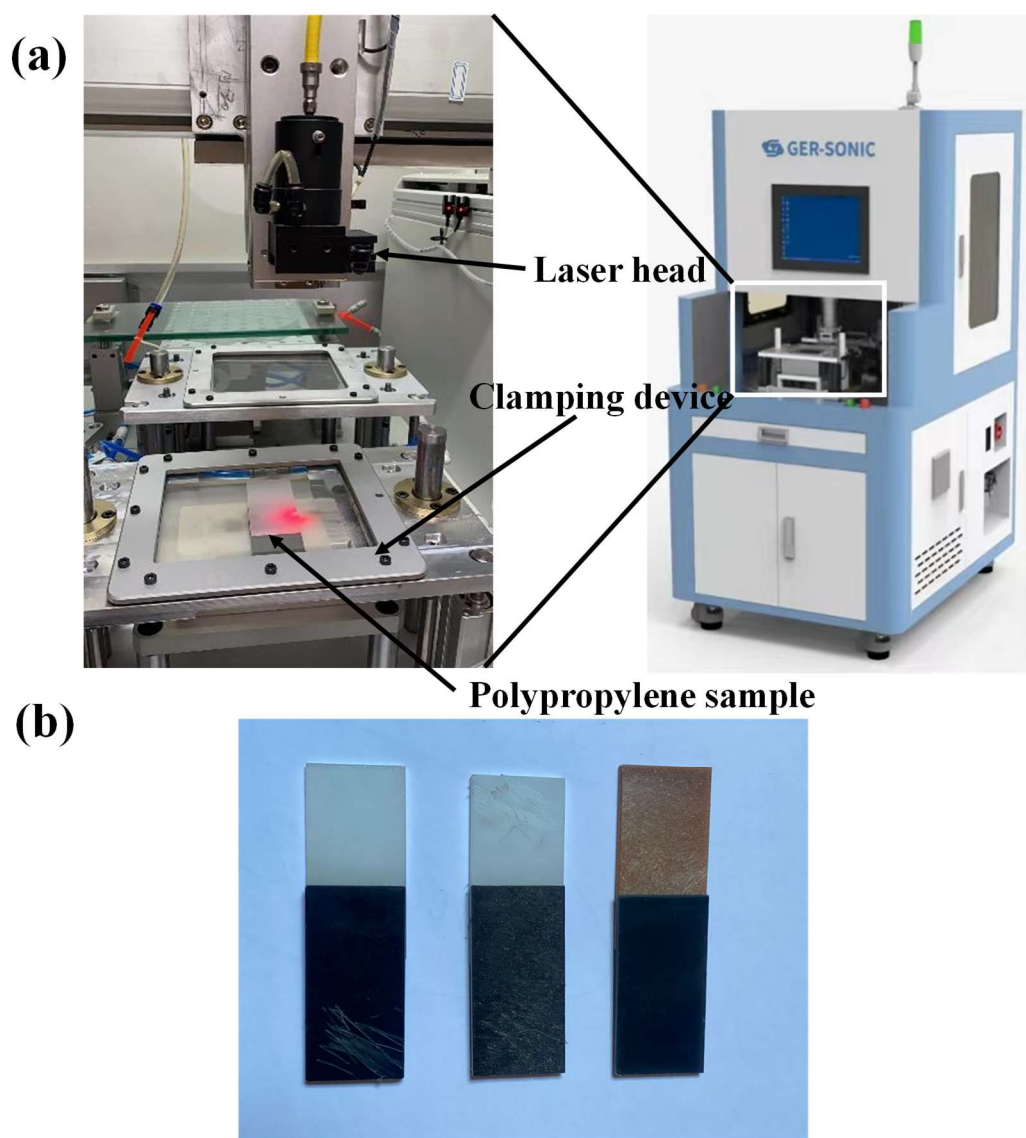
(a) Laser transmission welding experimental setup. (b) Samples joined using laser transmission welding.
